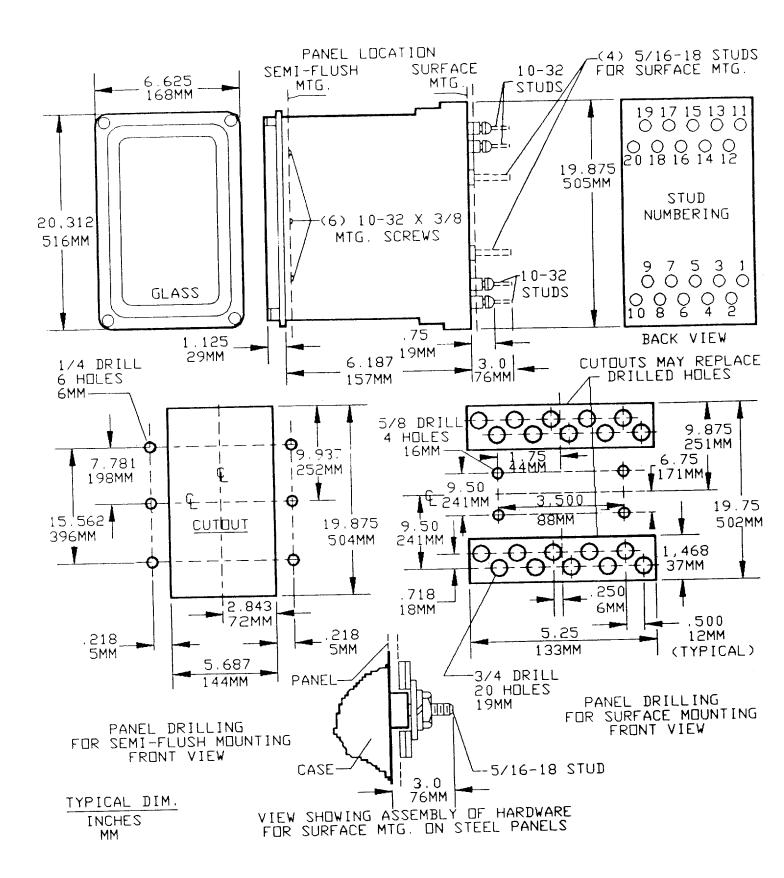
(6209276 [5]) Outline and Panel-Drilling Dimensions for CLPG12C Relay
